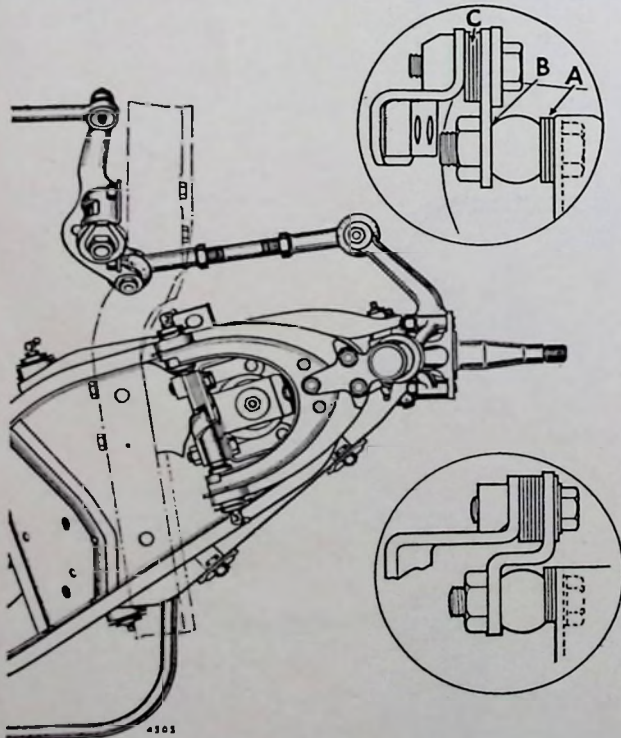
Plan view of the front suspension showing camber shim positions.
